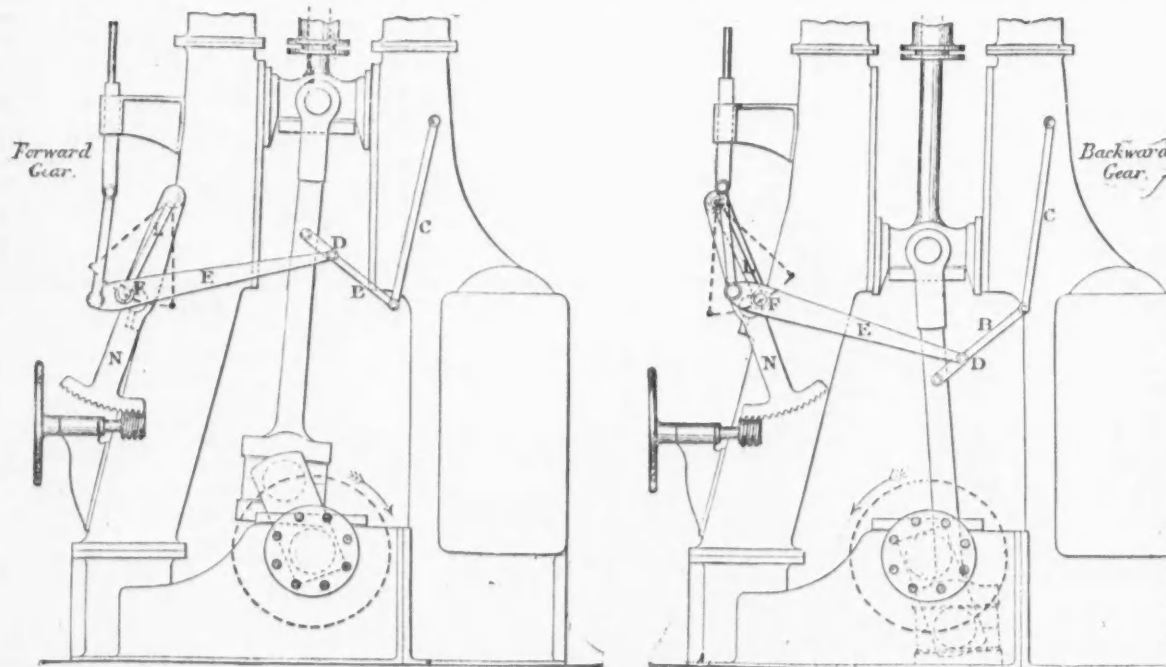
Example of the Joy Valve Gear Applied to a Marine Engine Employing a Radius Rod instead of Slide and Slide-way.
